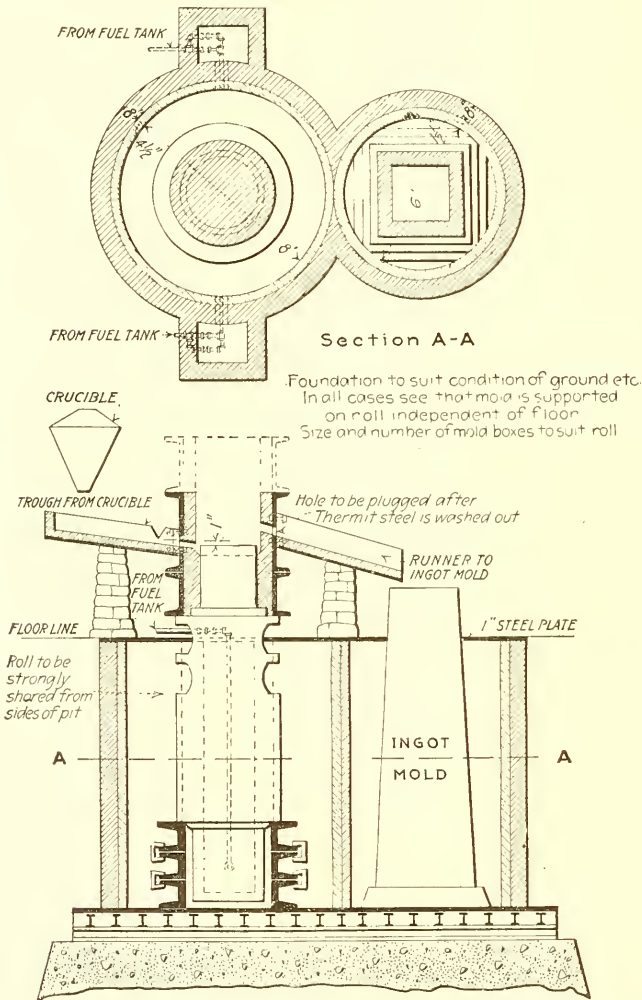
A Design for a Permanent Pit for Welding Necks on Large Rolls and Pinions. If Desired a Removable Fire-Brick Partition May Be Used Between Roll or Pinion Pit and the Ingot Mold Pit.
